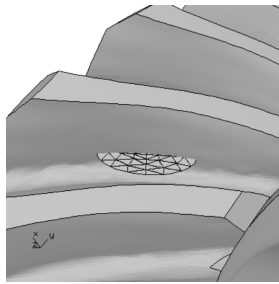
An image from the flaw insertion wizard showing an elliptically shaped crack which is positioned in a gear tooth
